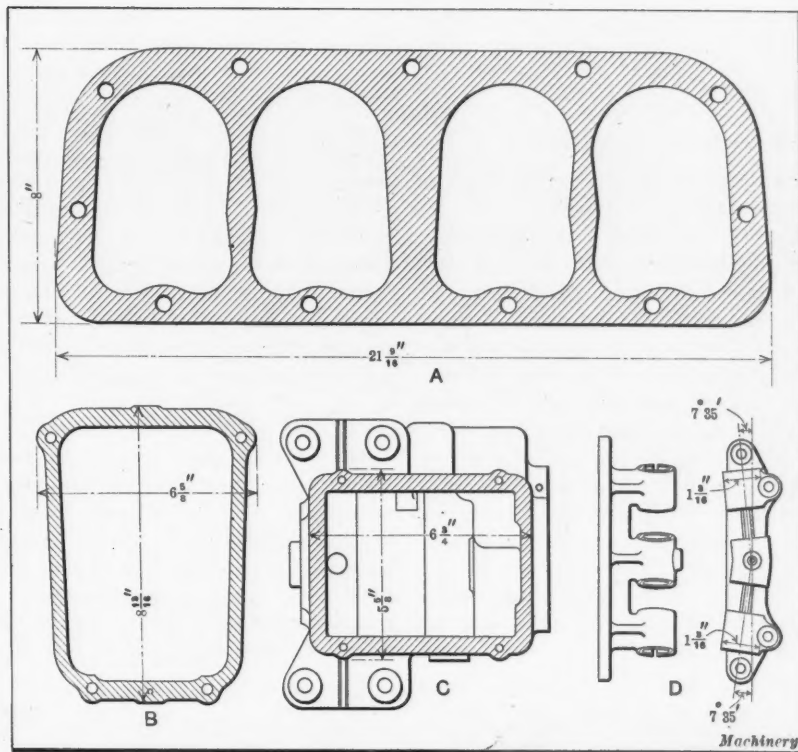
Examples of Work done on Newton Continuous Rotary Miller. Shaded Areas indicate Milled Surfaces
